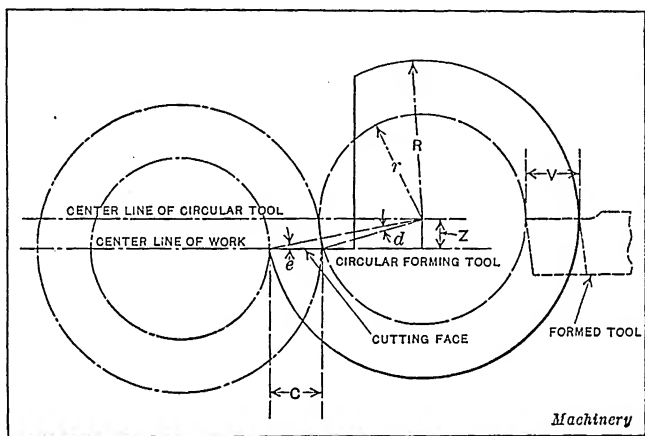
Relative Positions of Work, Circular Forming Tool, and Tool used in making Forming Tool
